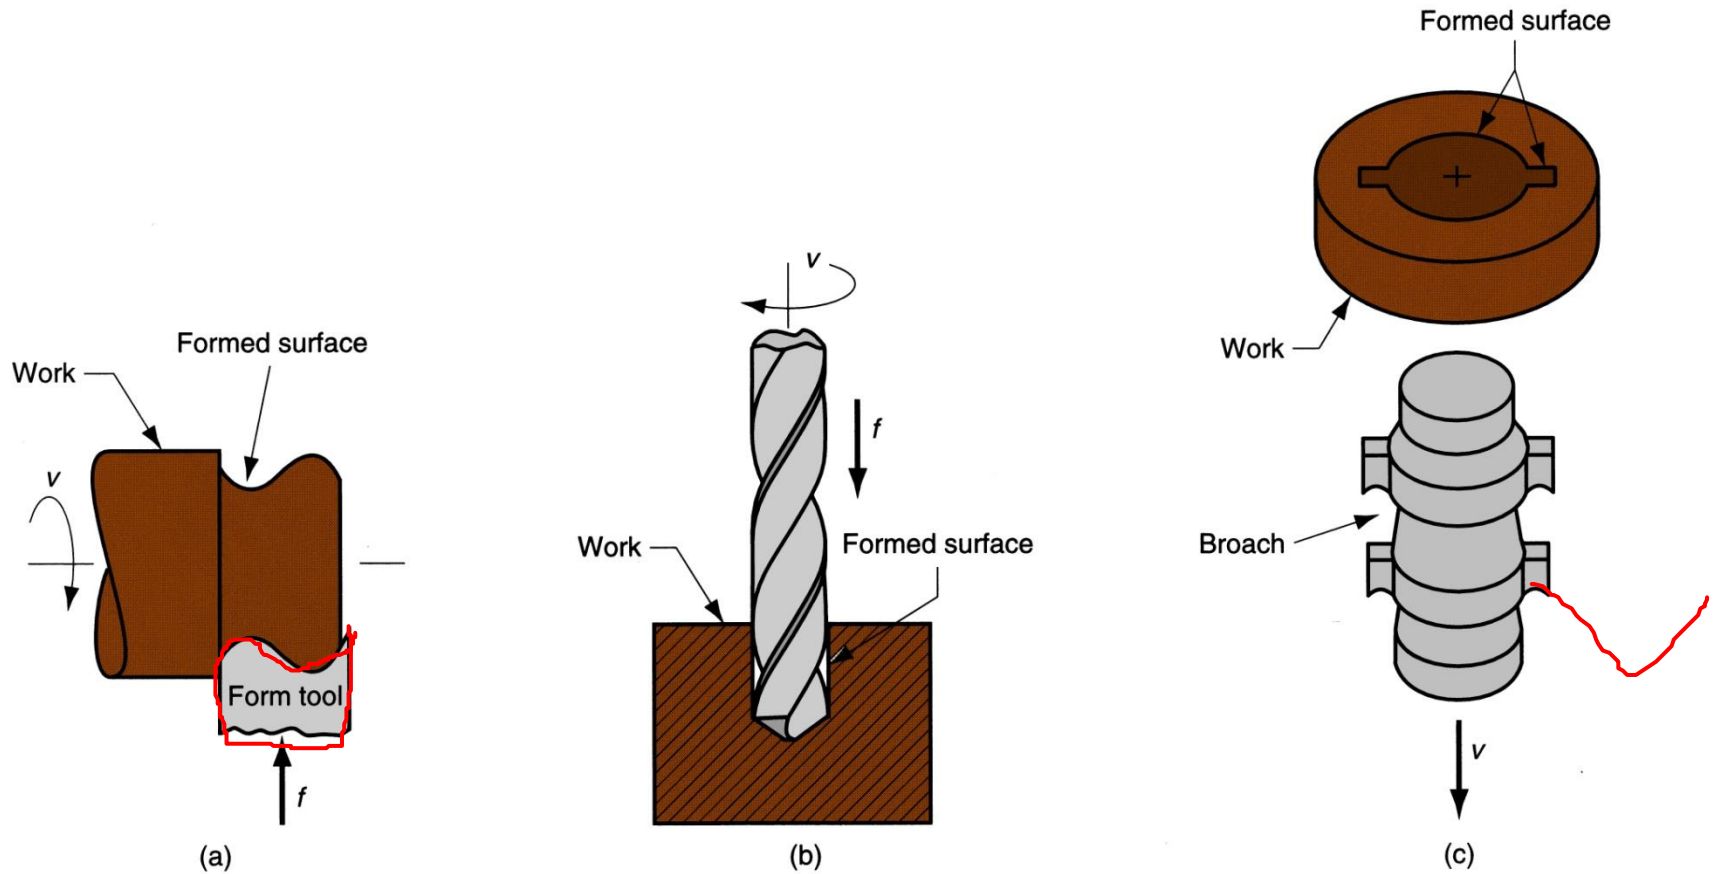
Forming to create shape: (a) form turning, (b) drilling, and (c) broaching
